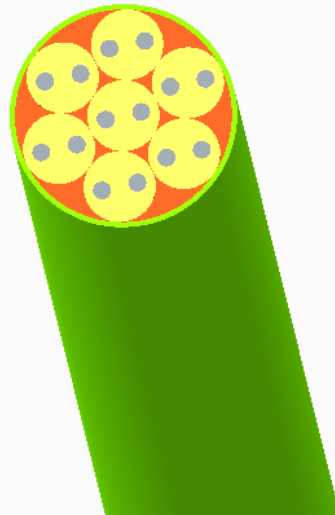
TCAT Assembly Showing 7 Individual Thermocouples
